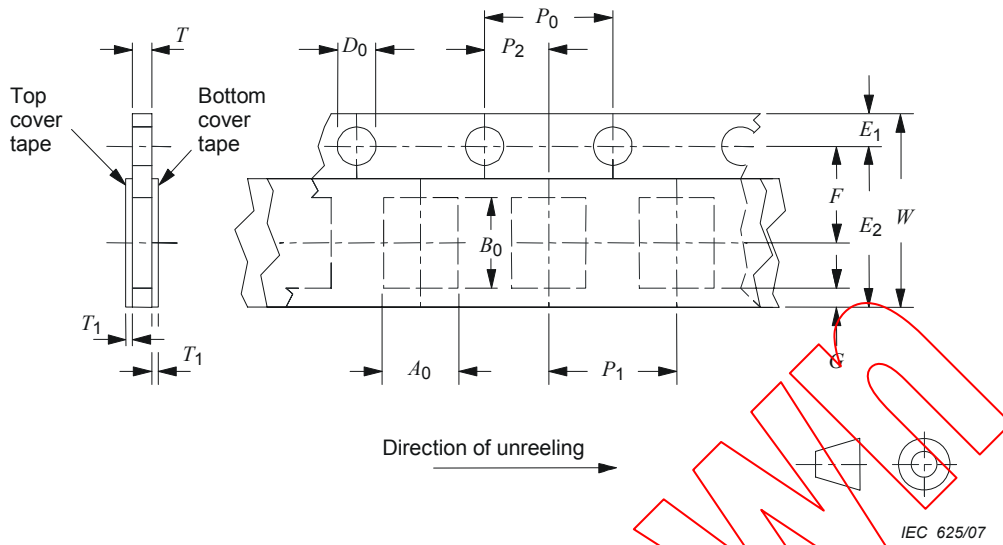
8 mm and 12 mm punched carrier-tape dimensions
